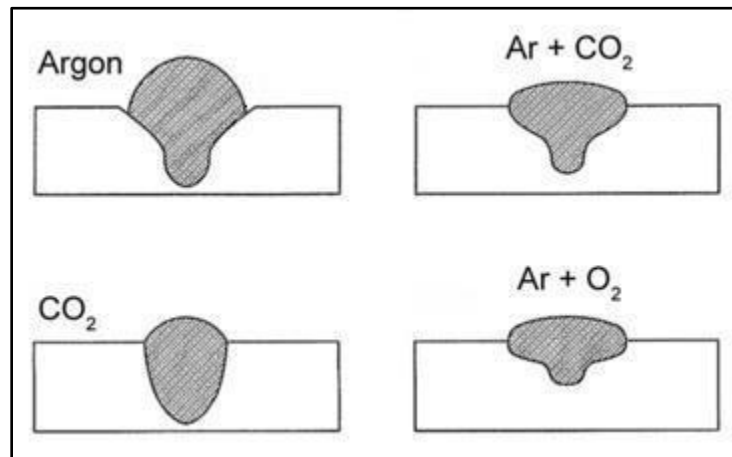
The effect of shielding gas composition on the weld penetration and bead shape for steel[7]
